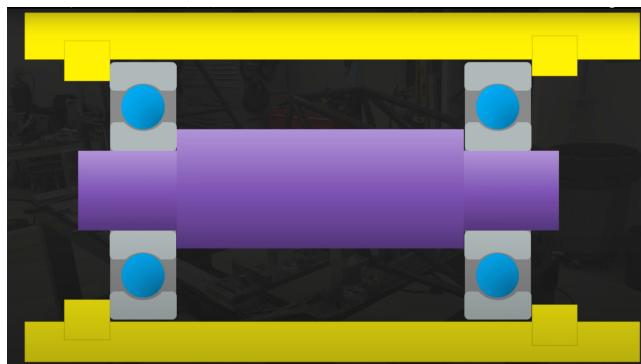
Mounting the bearings by clamping the outer race [20]
